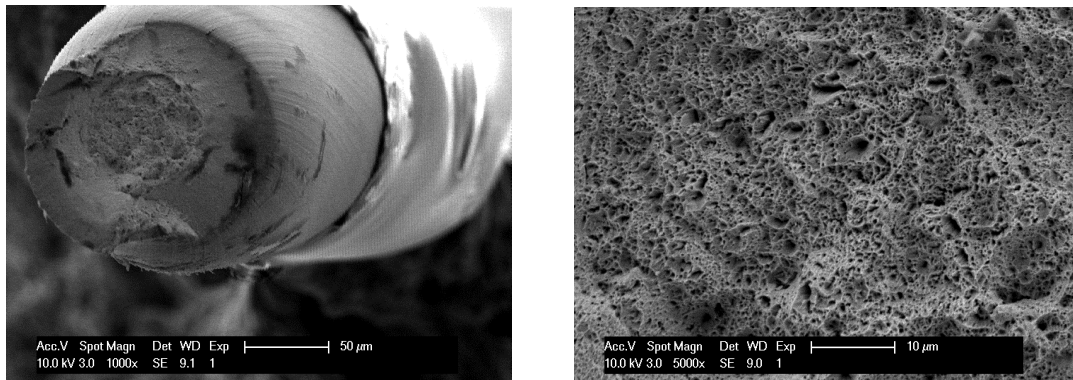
SEM images: (a) Cup-and-cone tensile fracture. (b) Dimples.
